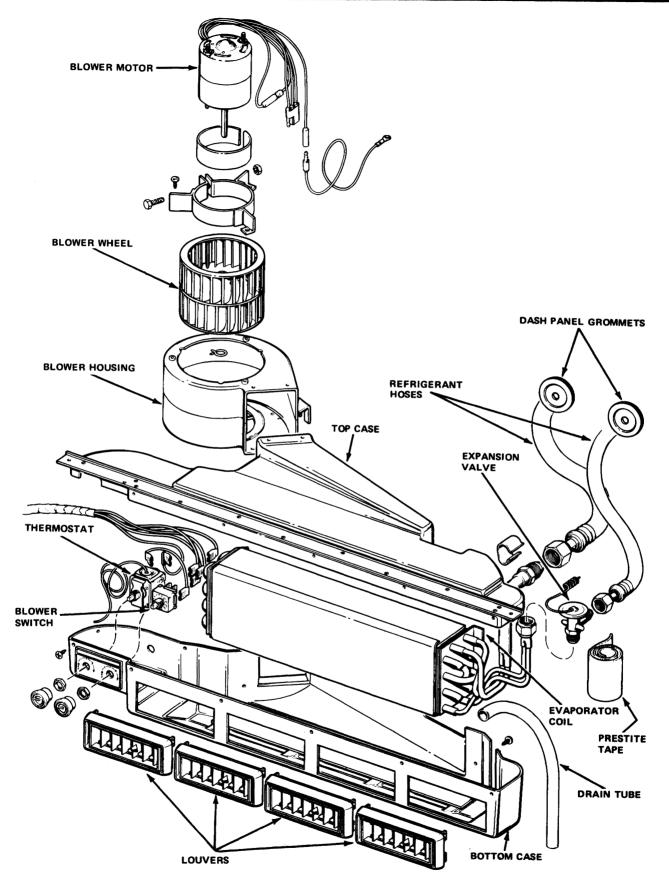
Evaporator Disassembly—1976-79 CJ Models
